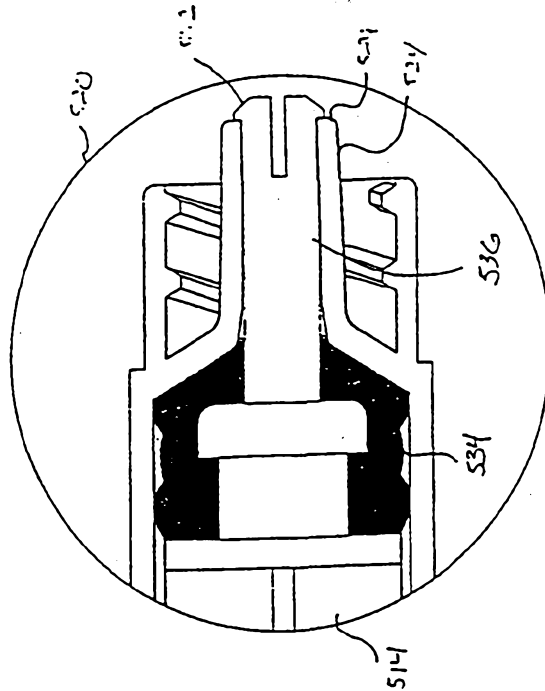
A SIDE VIEW - PLUNGER IN LOCKED POSITION
